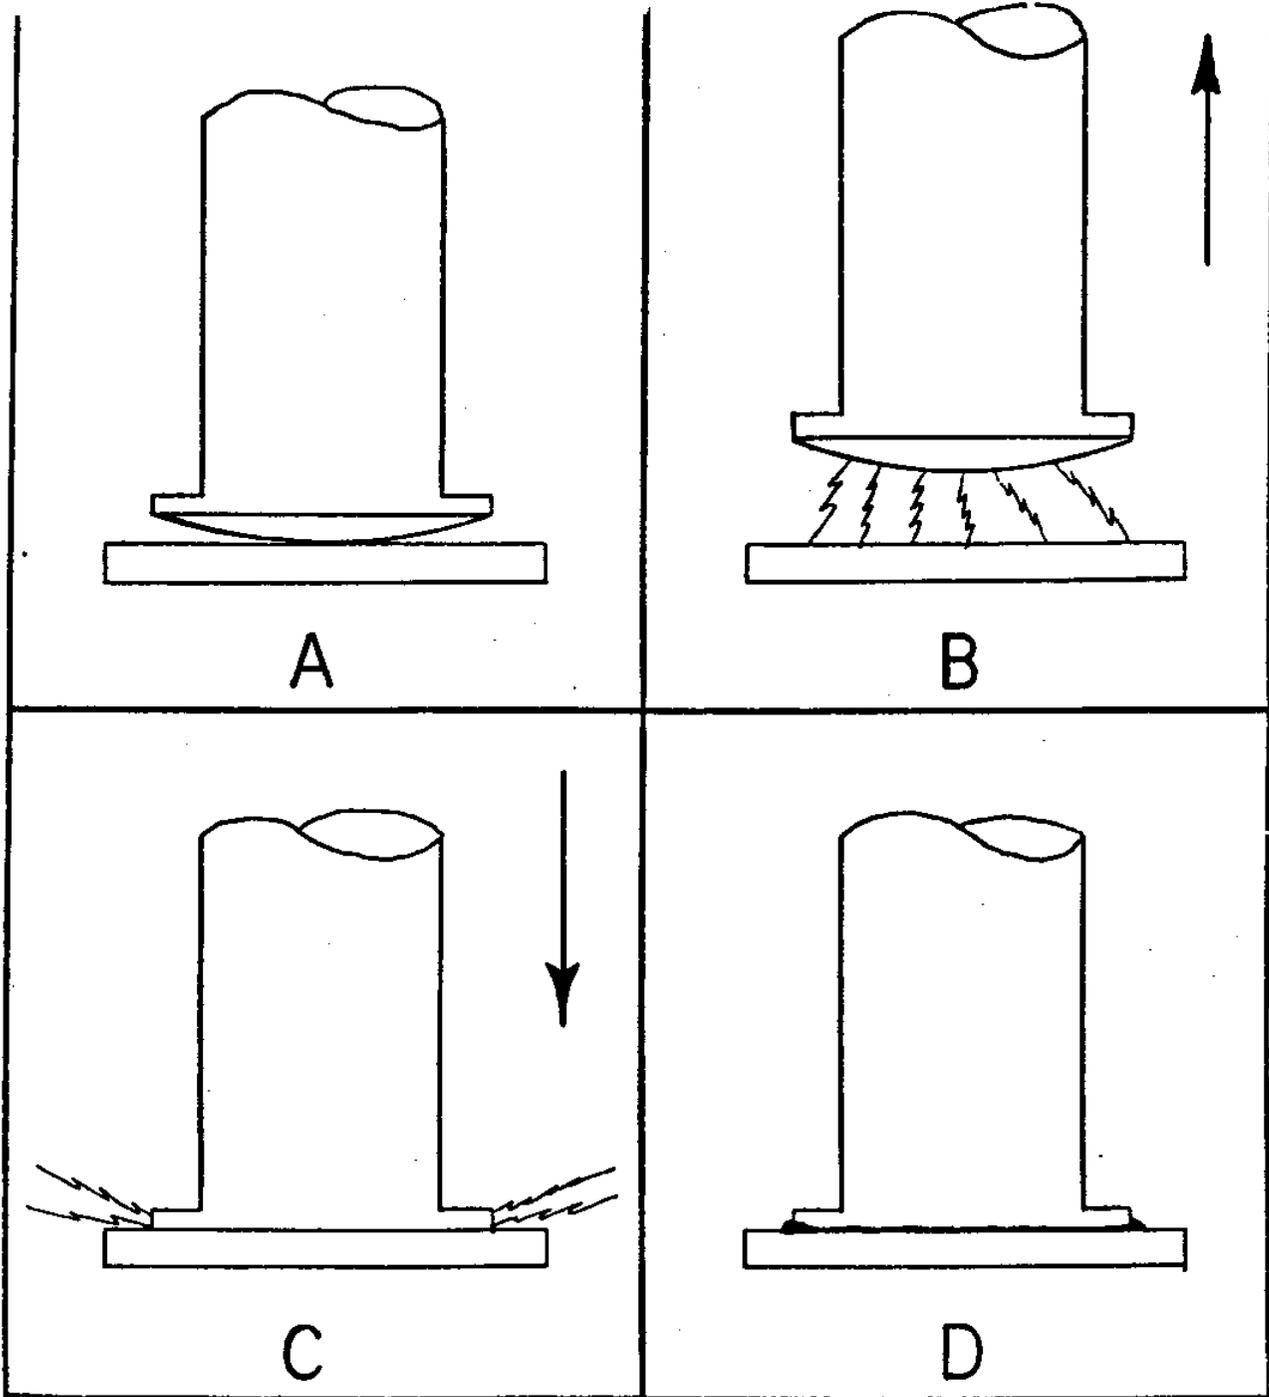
³² Schematic of drawn arc capacitor discharge stud welding; (A) Stud placed against work, (B) Gun lifts stud drawing arc, (C) Stud plunged into molten pool of metal, (D) Completed weld
